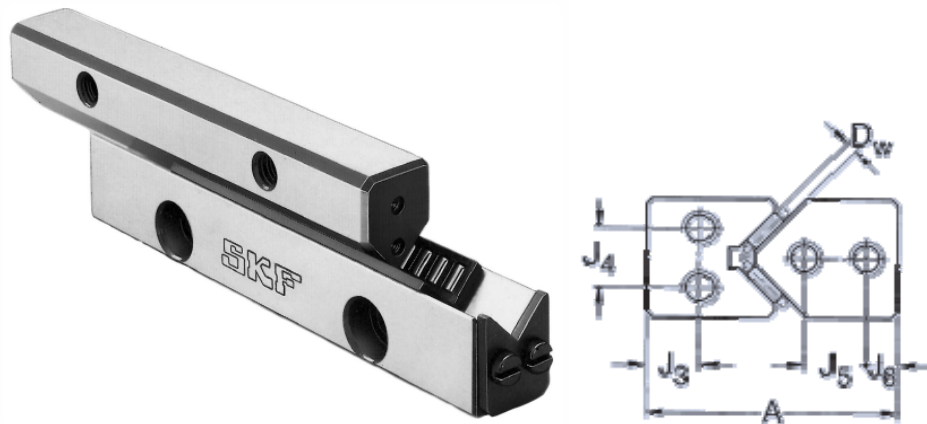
Typical mounting arrangement of needle cage linear bearings (no ACS featured)
